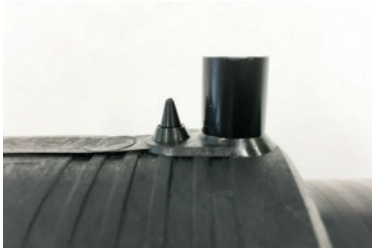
Welding indicator showing that pressure was applied during the welding process
